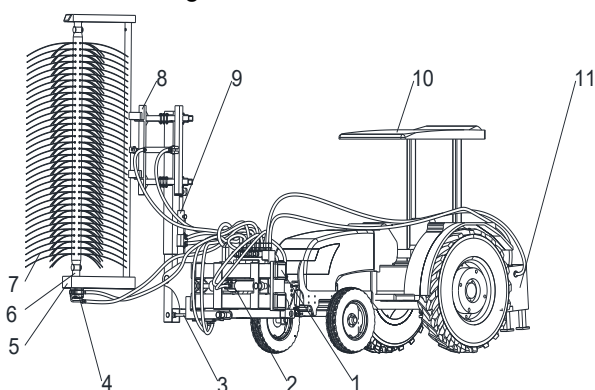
Schematic diagram of the overall flower-thinning machine
